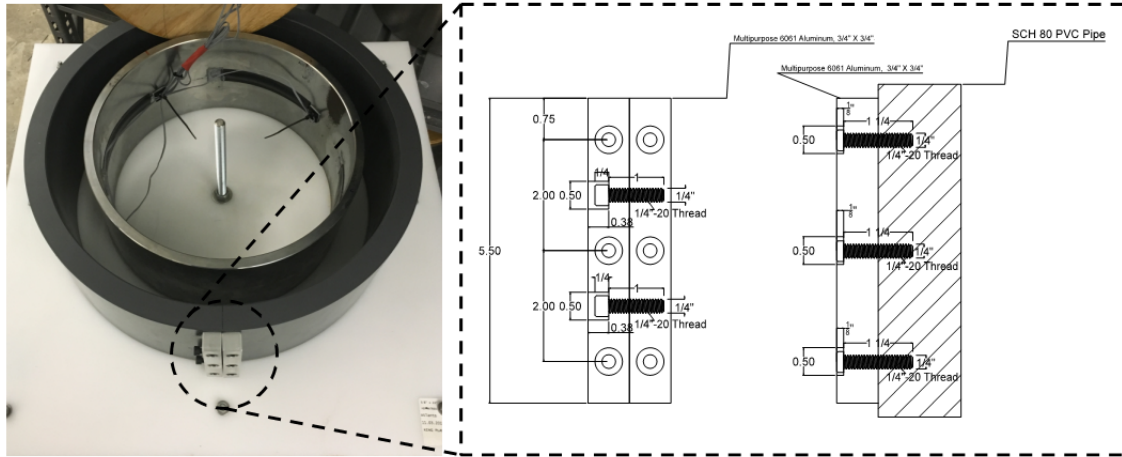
Stainless steel vise and CAD drawing used to align the 6-in longitudinal slit in the outer HPVC 16-in pipe
